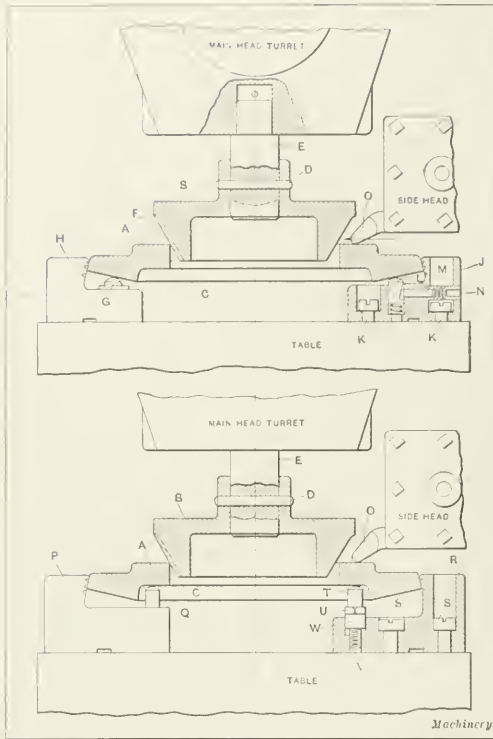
Two Methods of holding Bevel Gear Blank; the Method shown above gave Trouble through Slippage of Supporting Pins on Beveled Surface
